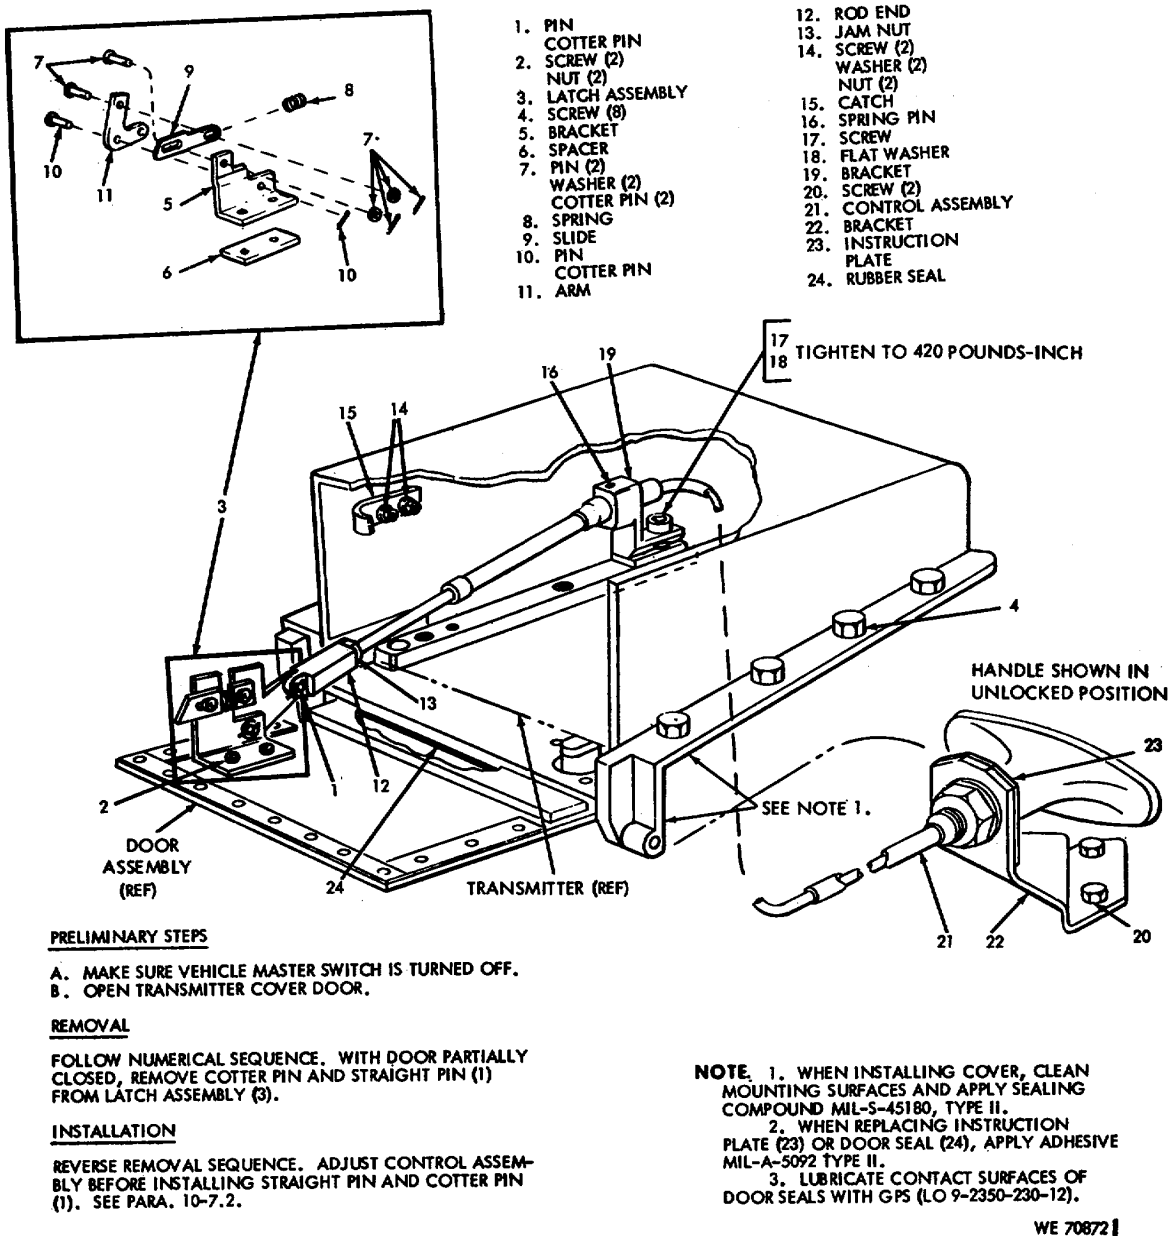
Removal/installation - infrared transmitter cover and disassembly/assembly of door latch and control assemblies.
